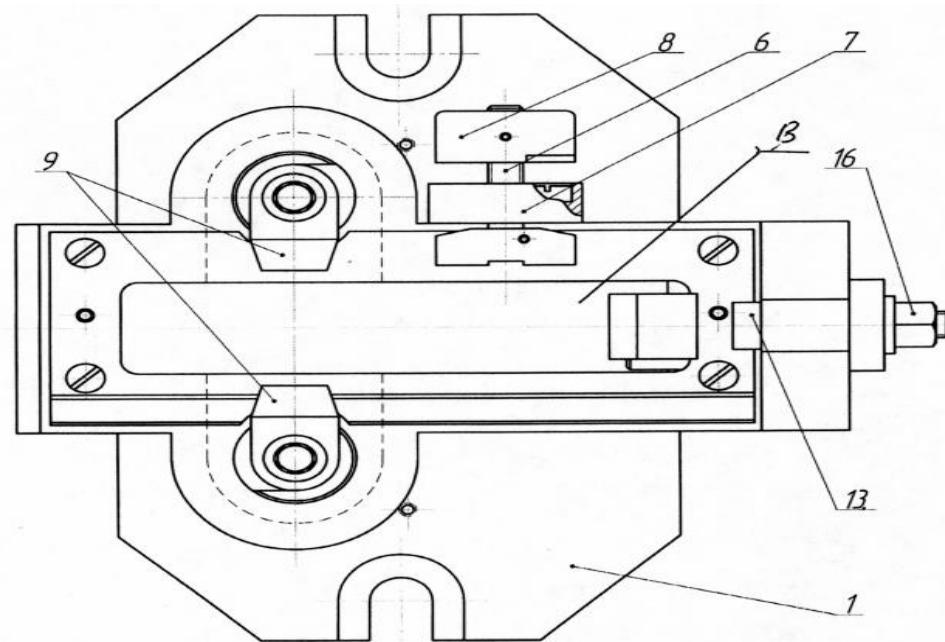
Design of a modern fastening and loosening device for machining of plate-type parts on a milling machine (horizontal view).
